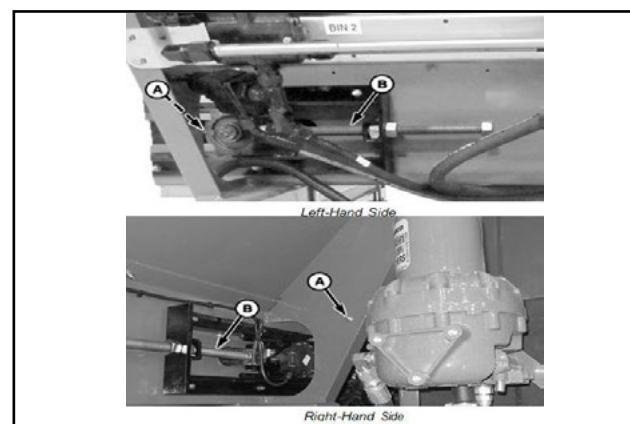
Idler Shaft Bearings & Adjusting Screws
